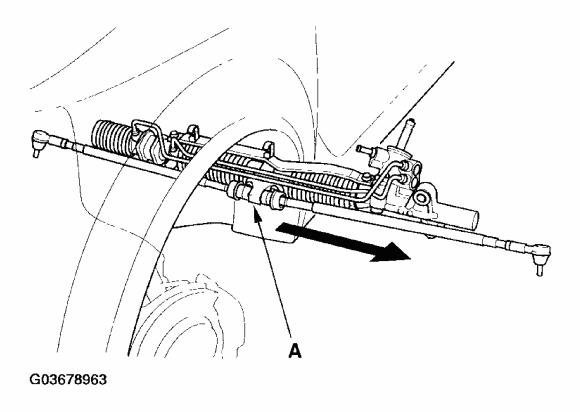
Removing Steering Gearbox Courtesy of AMERICAN HONDA MOTOR CO., INC.
